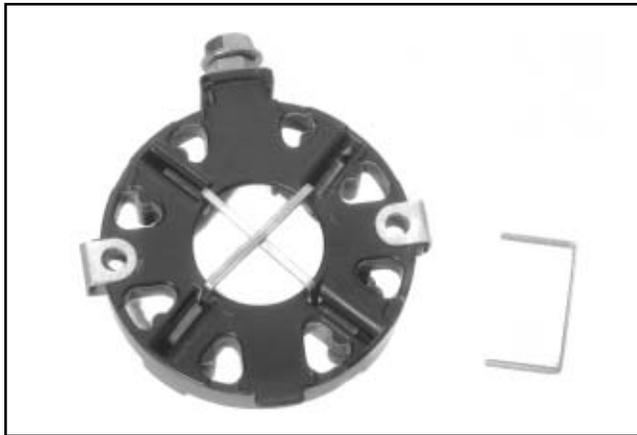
Style "B" Commutator End Cap with Brushes.
